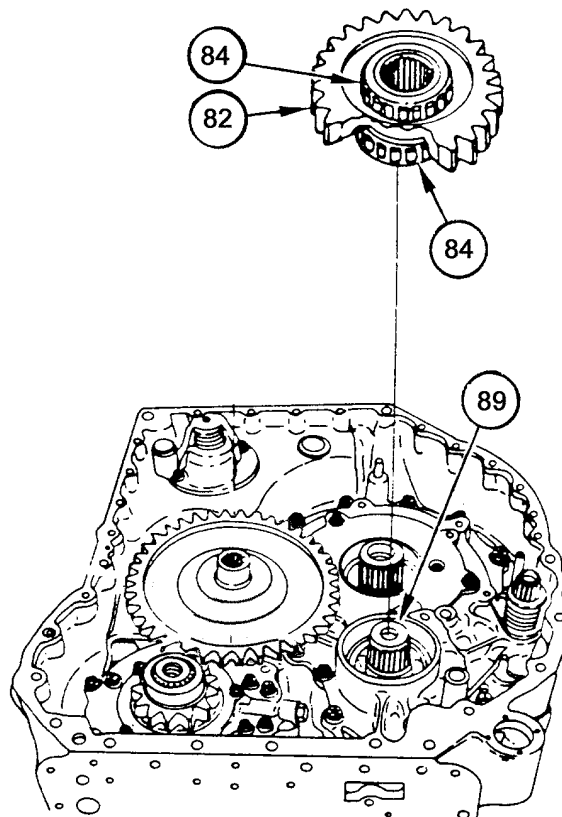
Steer Shaft Drive and Range Output Drive Gears.
